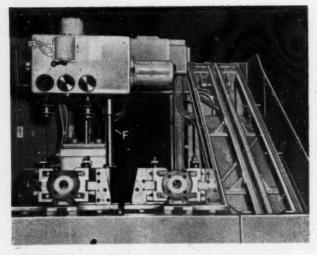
A View at the Delivery End of the Machine, Showing the Head for Automatically Unlocking the Fixture, and the Inclined Platen Transfer Conveyor
